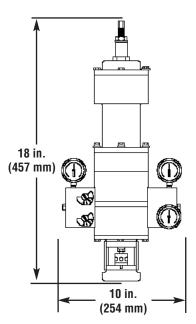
Overall dimensions of Becker Model VRP-600-CH Pilot Control System
